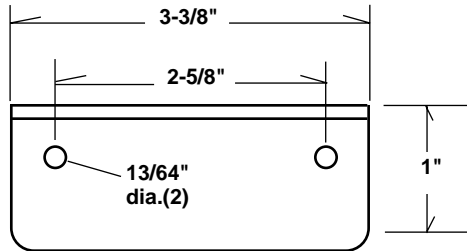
IHS Air Regulator Bracket Mounting Dimensions
